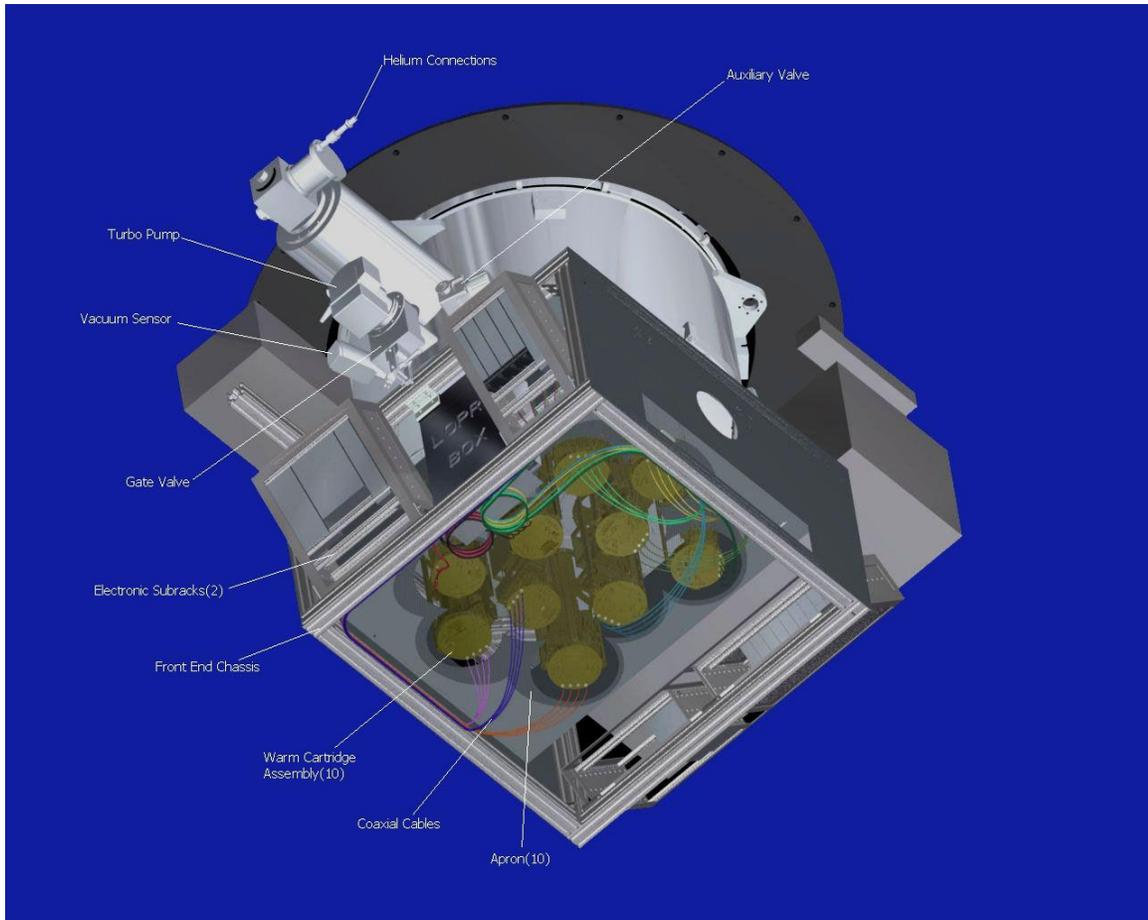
Bottom view of ALMA frontend, showing WCAs.
